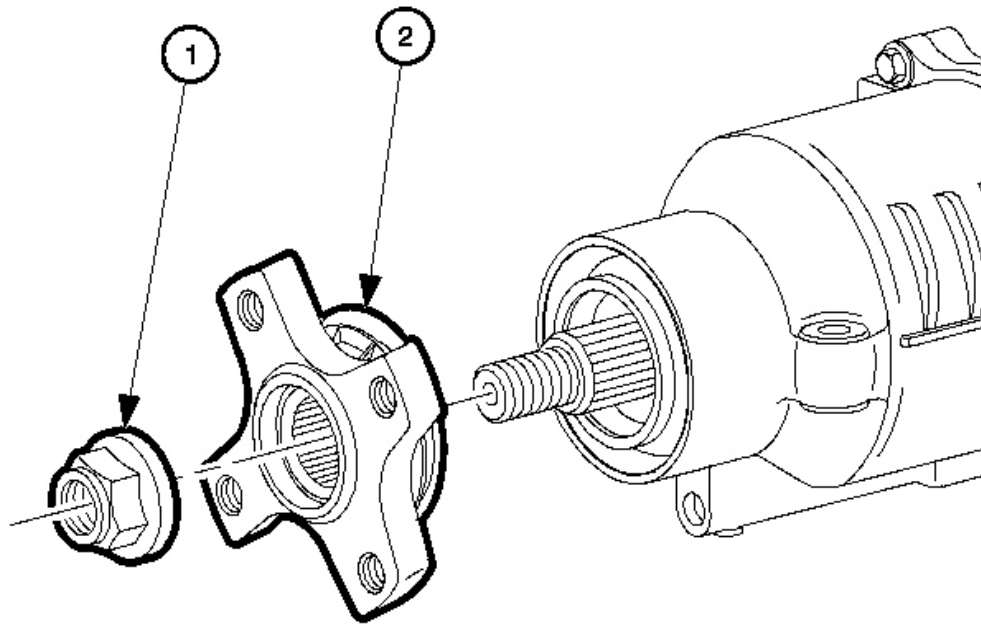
Removing/Installing Pinion Flange Nut On The RDM
